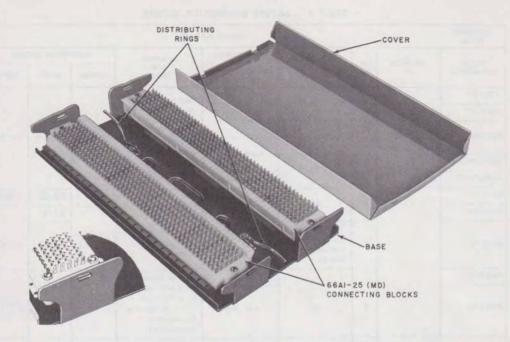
A1-25(MD) Connecting Blocks Mounted in a 115D1 Apparatus Box
